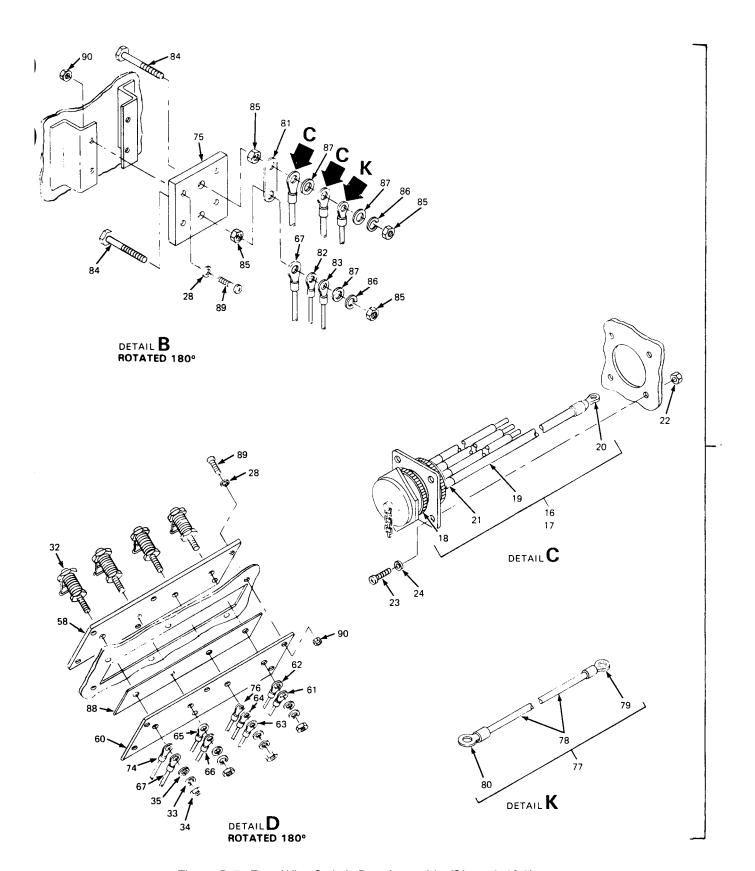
Four-Wire Switch Box Assembly (Sheet 2 0f 3).
